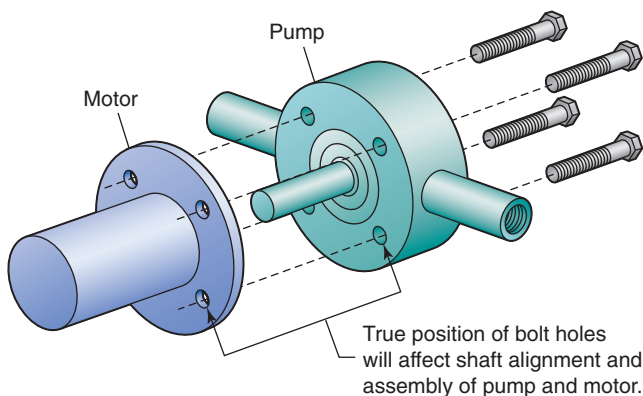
Pump and motor bolt hole patterns must match in position to accomplish assembly.
